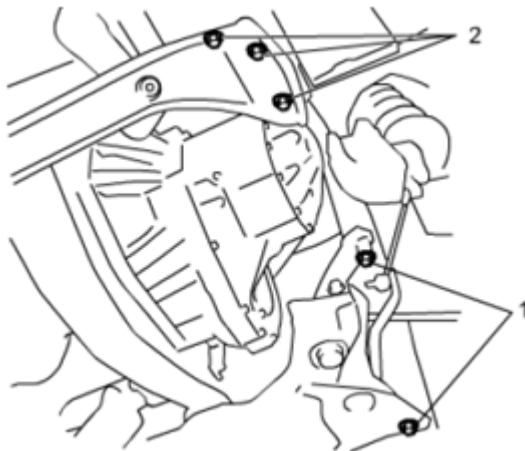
Supporting Front Suspension Frame And Engine Front Mounting Member
